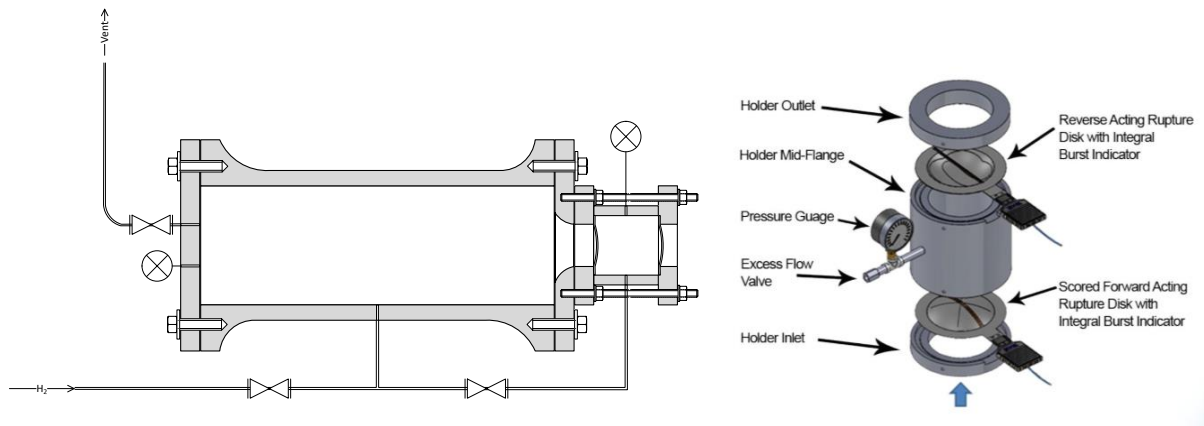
Schematic of proposed hydrogen storage vessel, incorporating double bursting disc assembly and TPRD off-take.
